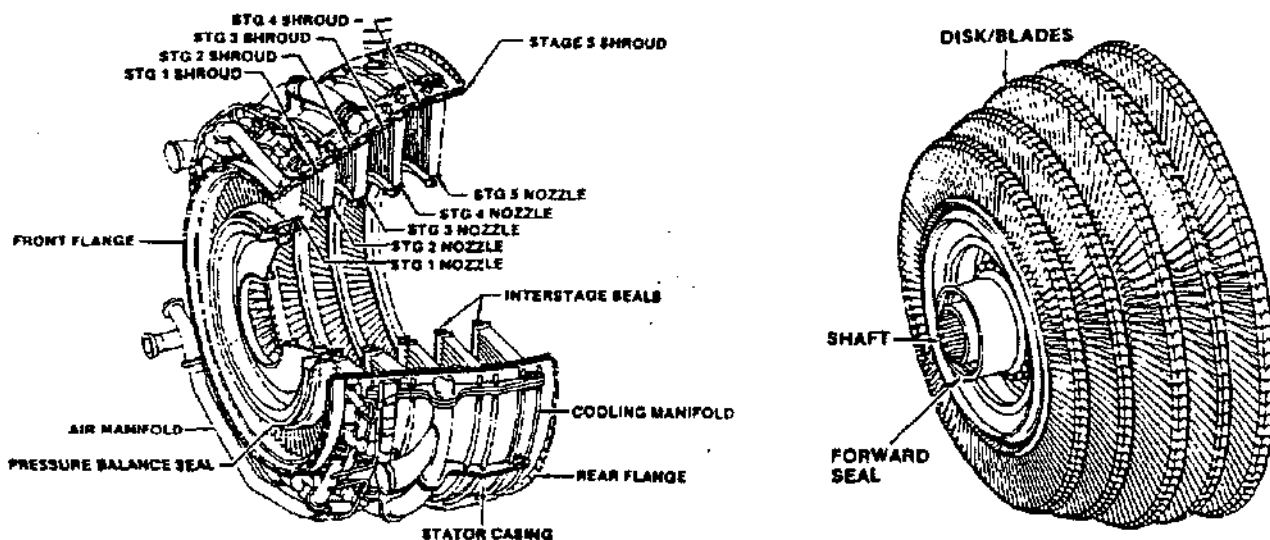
Typical LPT Nozzle and Rotor Assemblies
